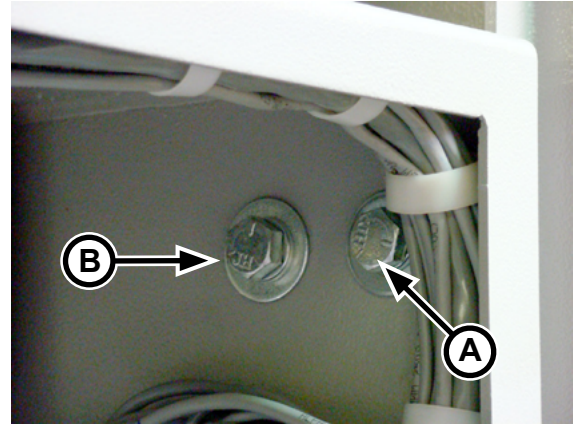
Make sure the O.P.L.'s mounting holes align with those on the moving posts.
